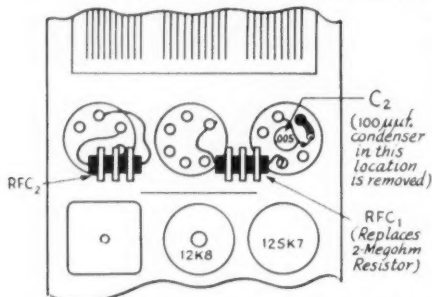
Top view of chassis showing how the new components are mounted on the coil socket terminals. Other wires and components not shown in this sketch are left in place.
